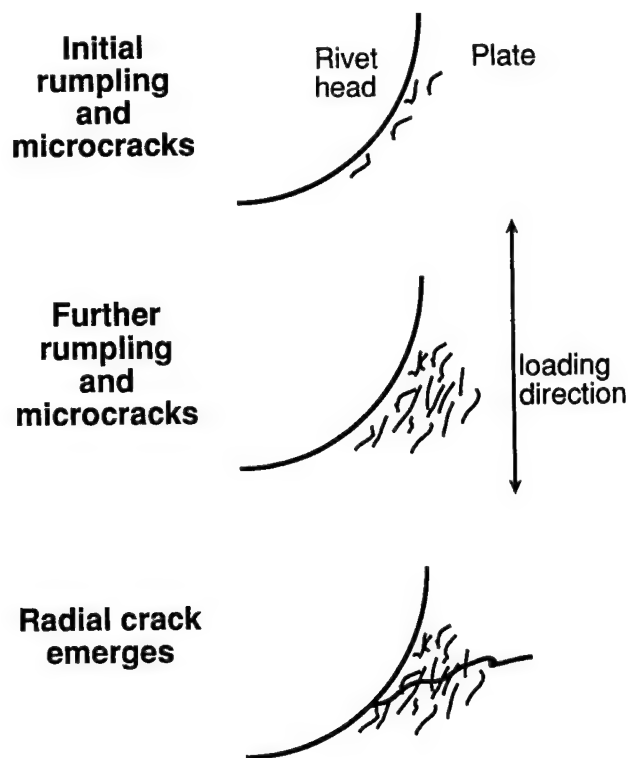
Sketch Depicting Microcracks and Propagating Radial Crack Adjacent to Rivet Head.
